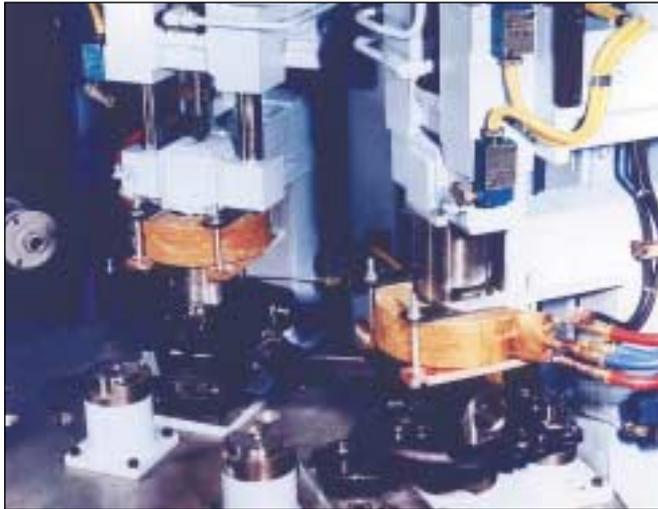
Preheat and final heat stations of the system for shrink-fit assembly of truck steering knuckles (see Fig. 1). A line-frequency source powers the C-core inductors.
